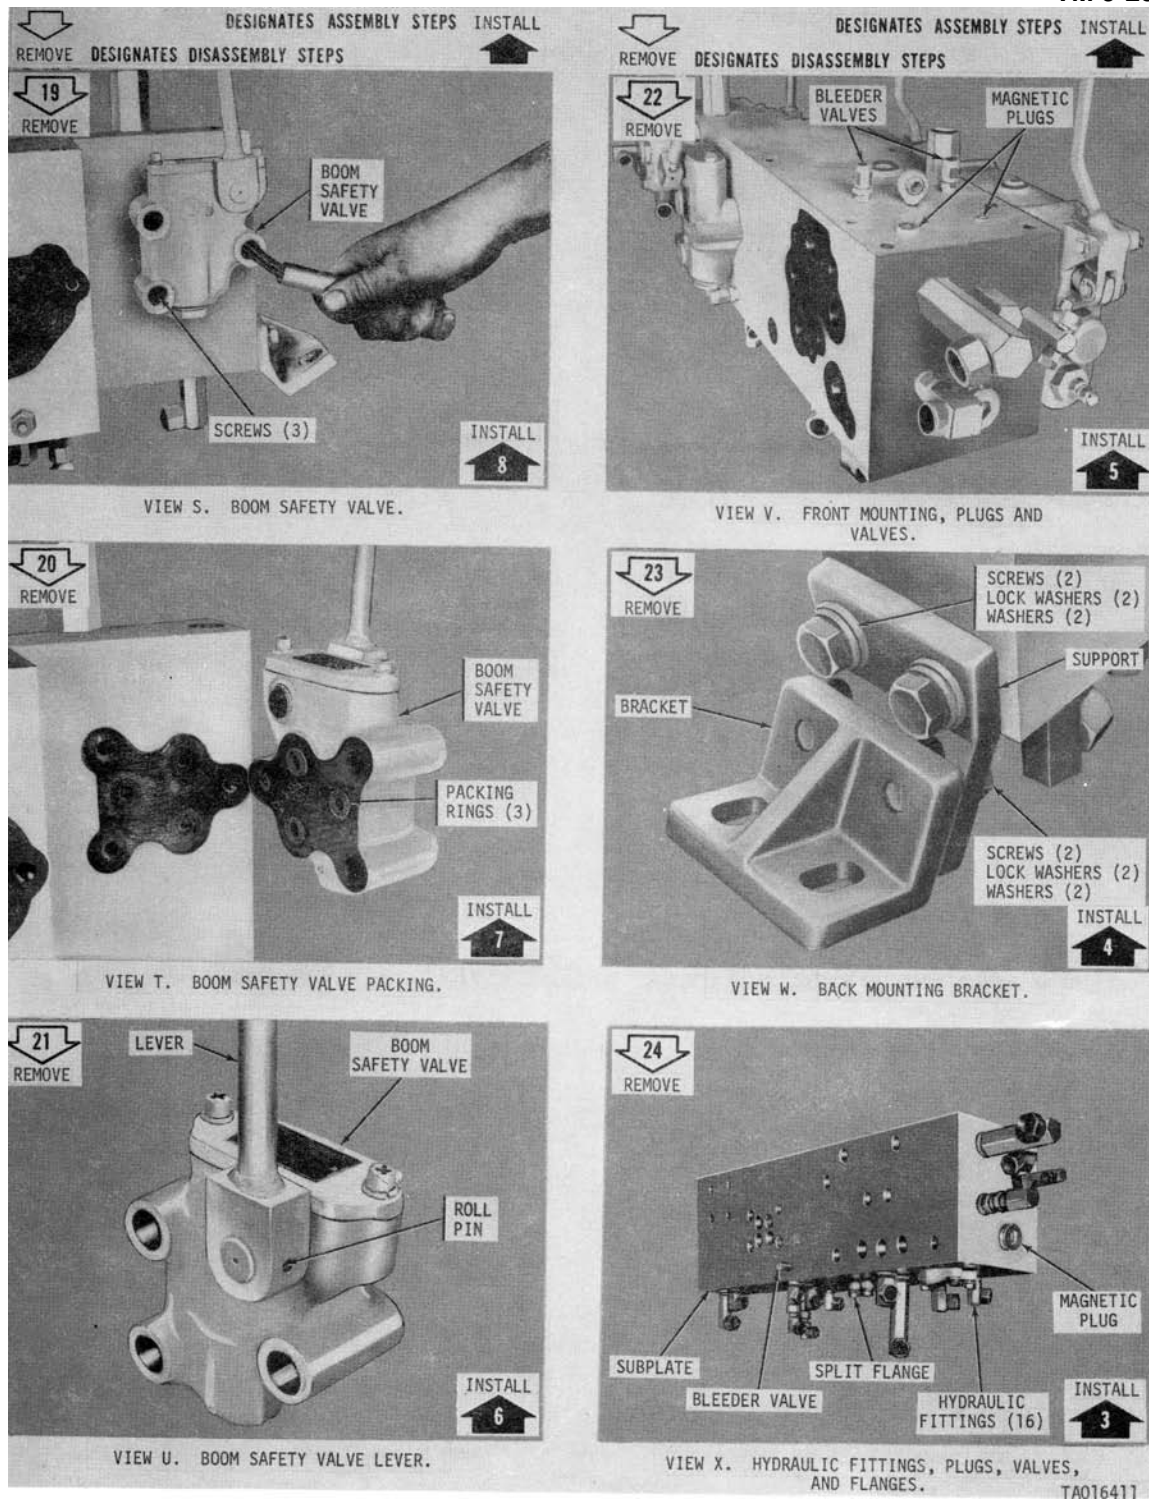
Disassembly of hydraulic subplate assembly into subassemblies (Sheet 4 of 5)
